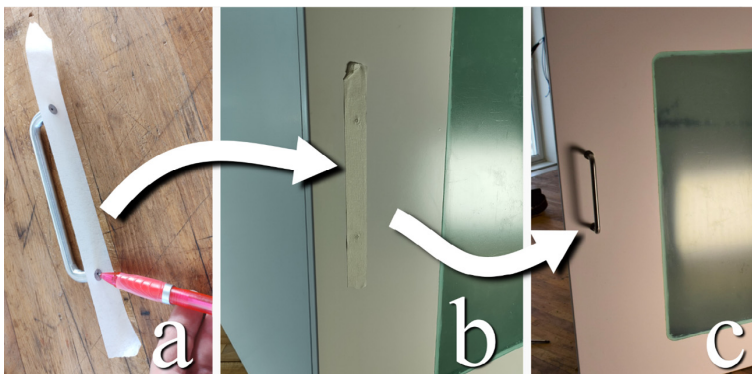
a) Mark hole pattern on a piece of masking tape. b) Place the tape in the desired position. c) Drill according to markings and install the handle.
